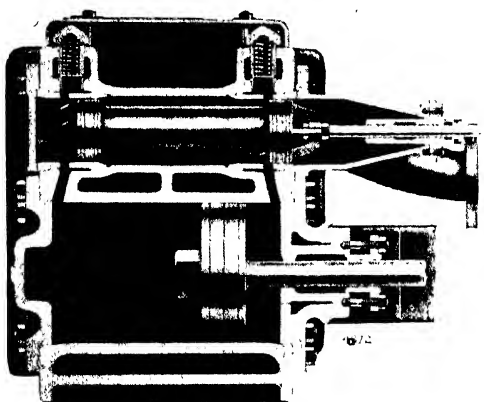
SECTION OF CYLINDER FITTED WITH PISTON VALVE
